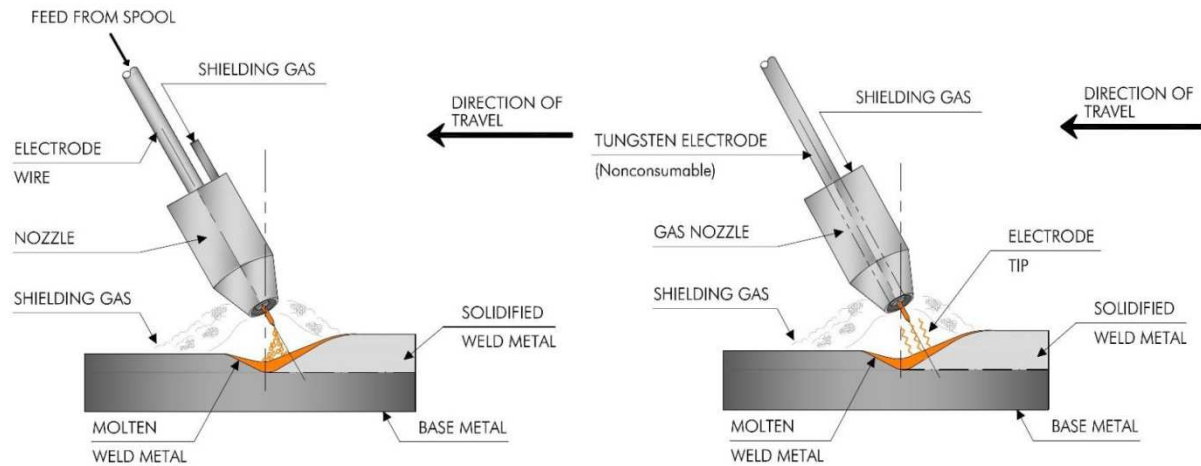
Illustration of arc welding processes: GMAW (left) and TIG welding (right) [1].
